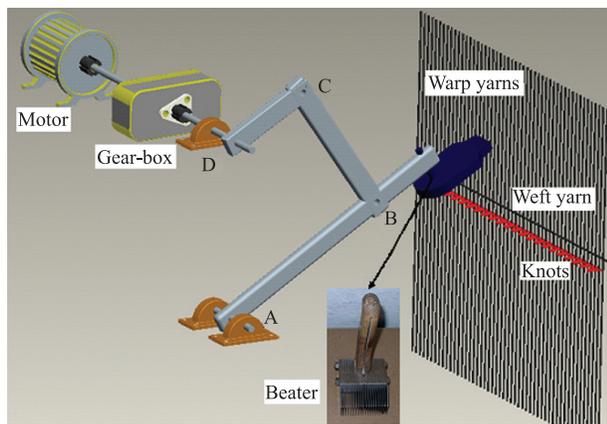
Crank-rocker type beat-up mechanism placed in front of the handmade carpet loom
